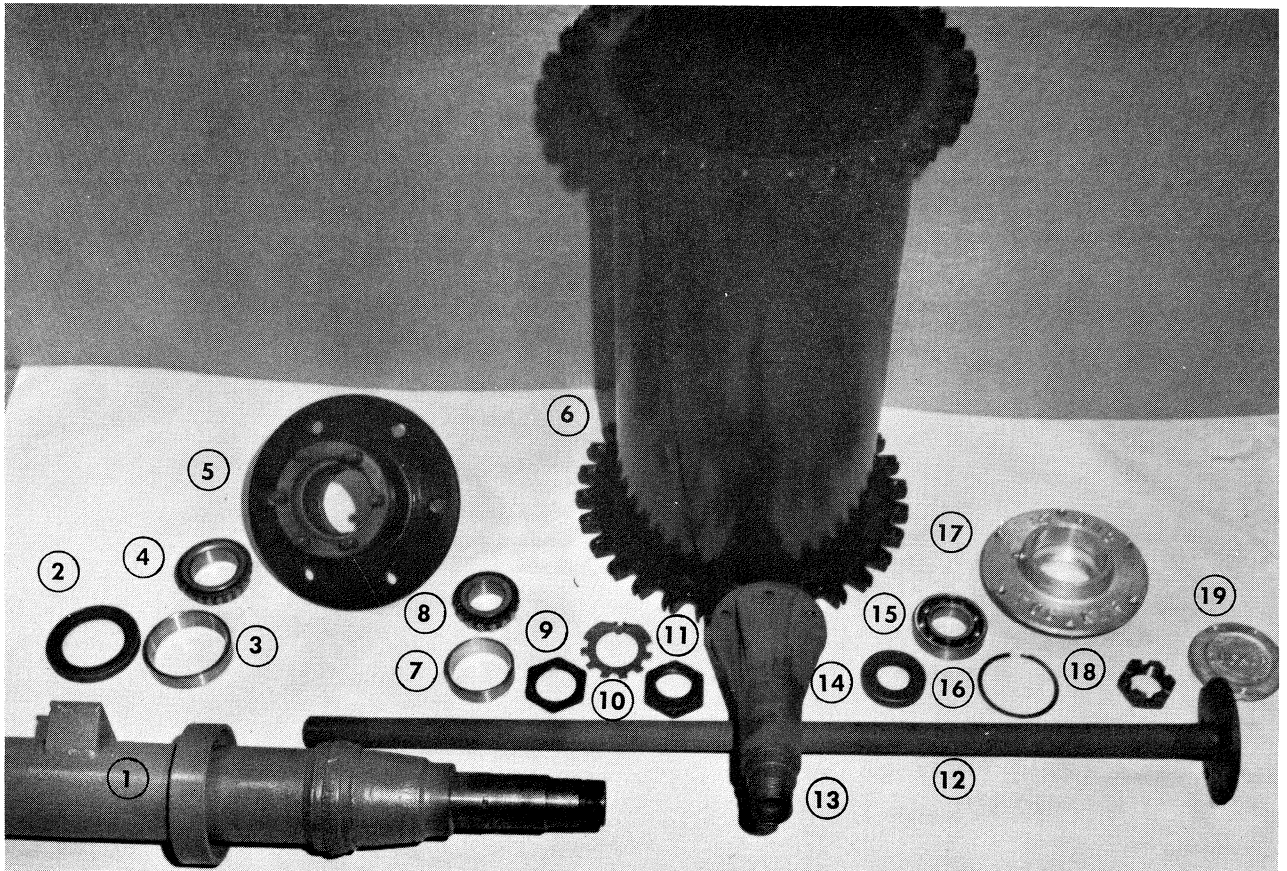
Differential Housing, Axle & Sprocket Assembly
